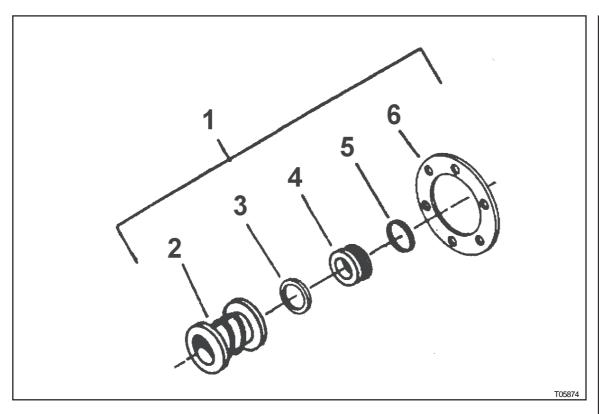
Compressor crankshaft seal assembly for housing mounted clutch
